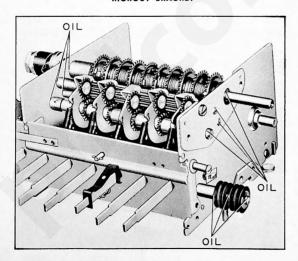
PUSH-BUTTON GEAR TRAIN, SHOWING ARMATURE ENGAGED WITH MAIN PINION
